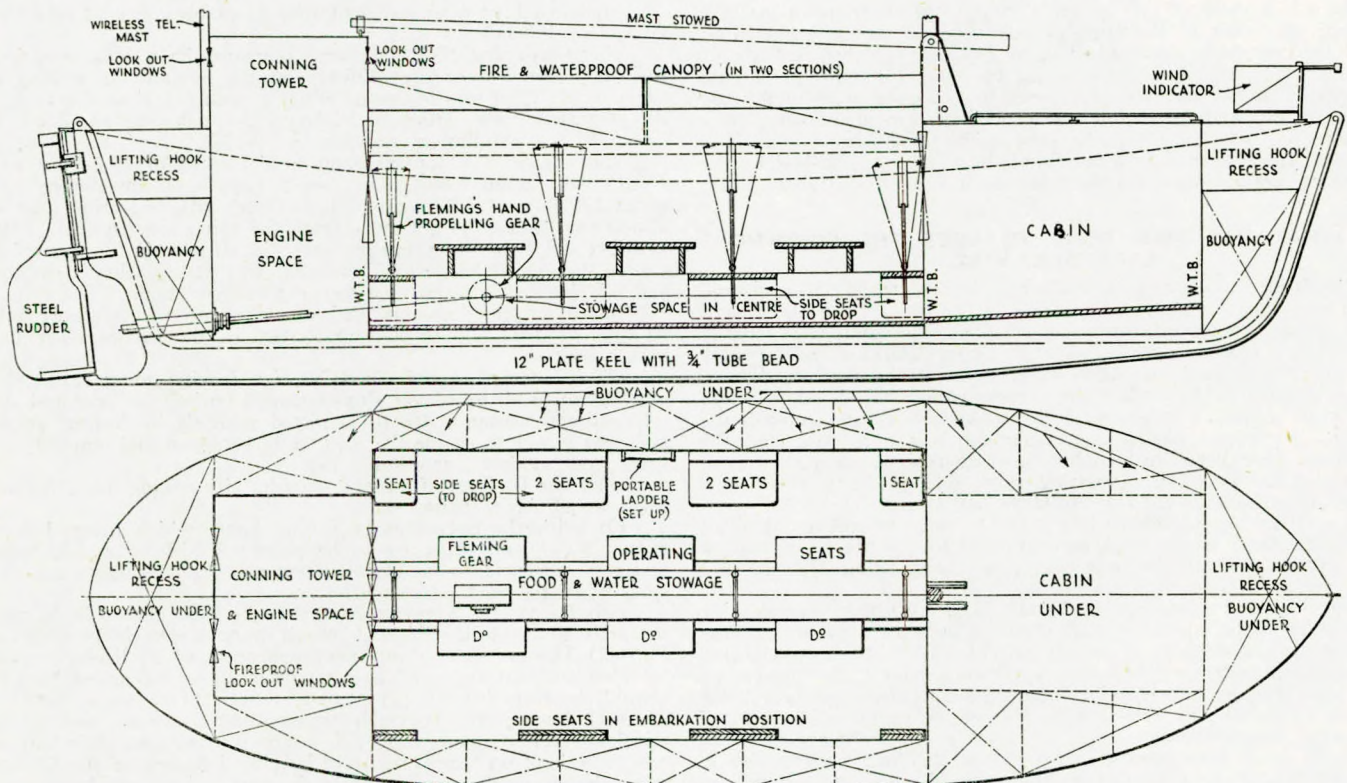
Profile and plan of details of new type of metal lifeboat for oil tankers.
